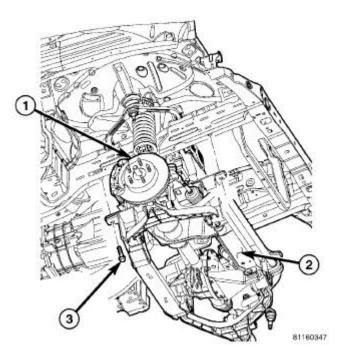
Engine Cradle Courtesy of CHRYSLER LLC
